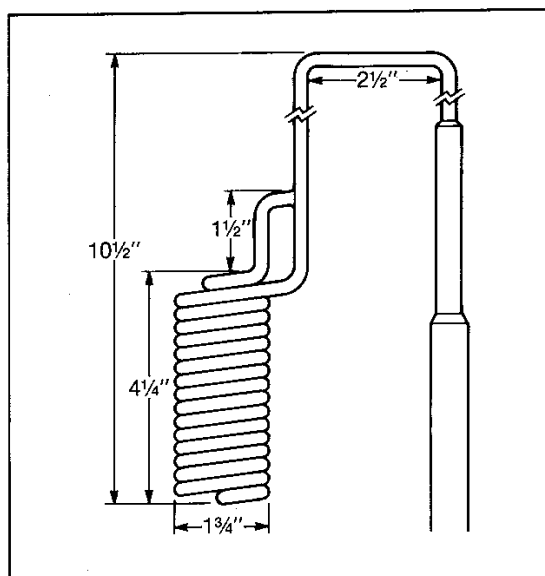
Lauda Immersion Cooler IC-8 Cooling Coil
